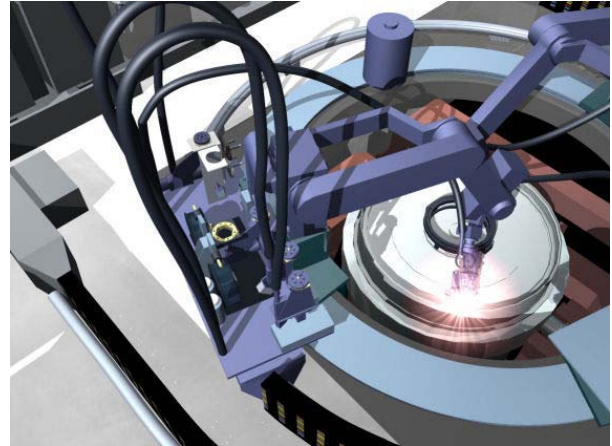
An illustration showing the robot welding and the detachable weld tray located behind it with end effectors and umbilicals.
